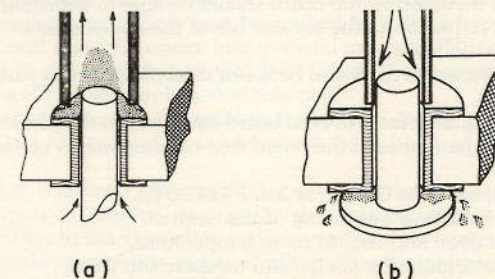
Solder extraction methods: (a) Pressure mode, and (b) vacuum mode.
